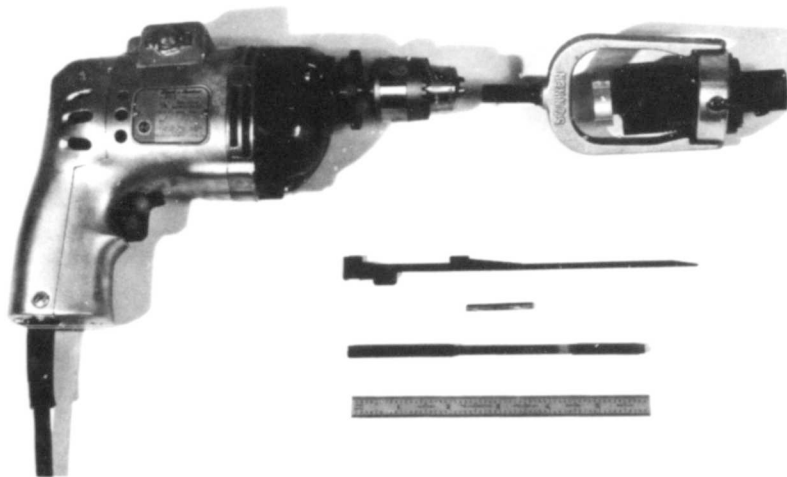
Honing Tool for Tungsten Plated .220 Cal Gun Barrel
